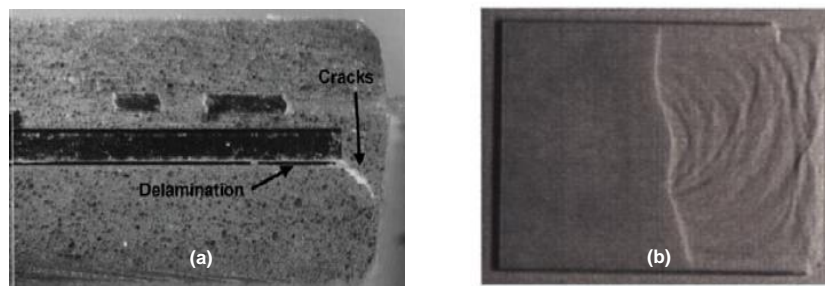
(a) Solder Fatigue and (b) Cracks and ceramic substrate failure [25] [26]
